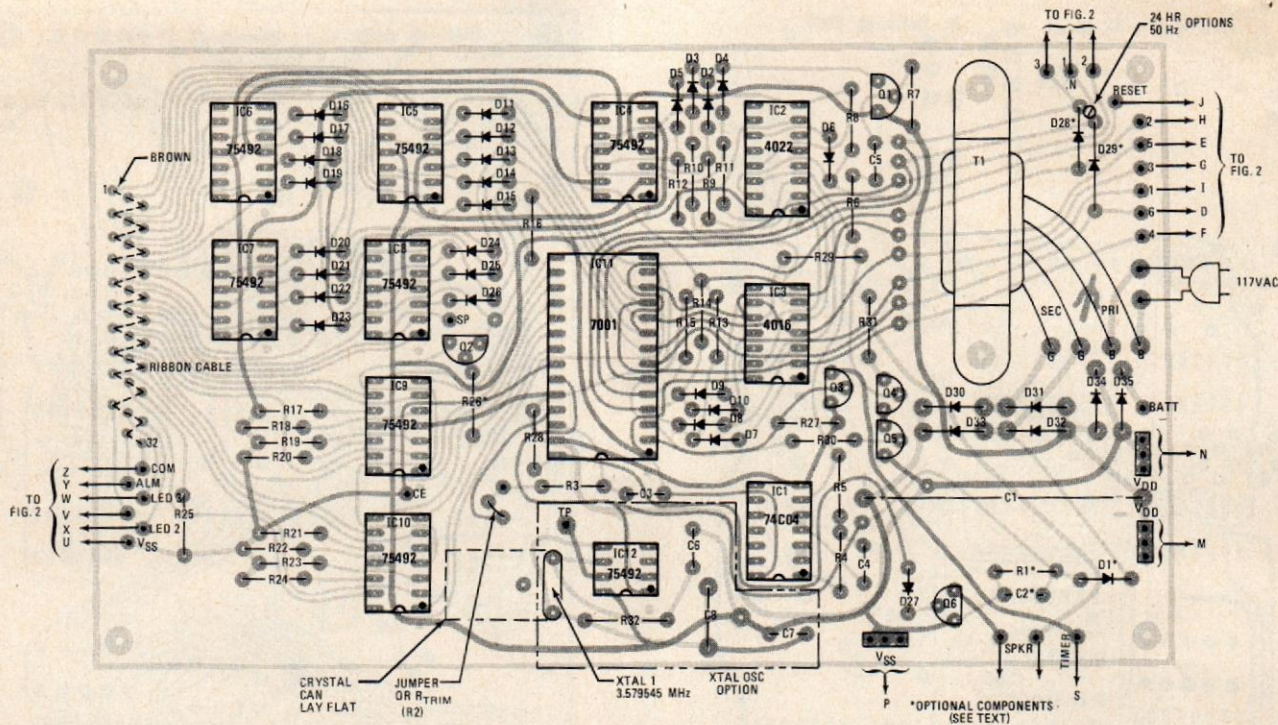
COMPONENT PLACEMENT diagram of clock board.
